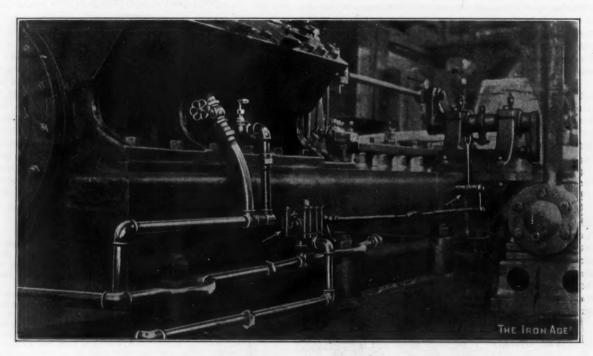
The Manning Cylinder Drain and Relief Valve Applied to a Rolling Mill Engine.
